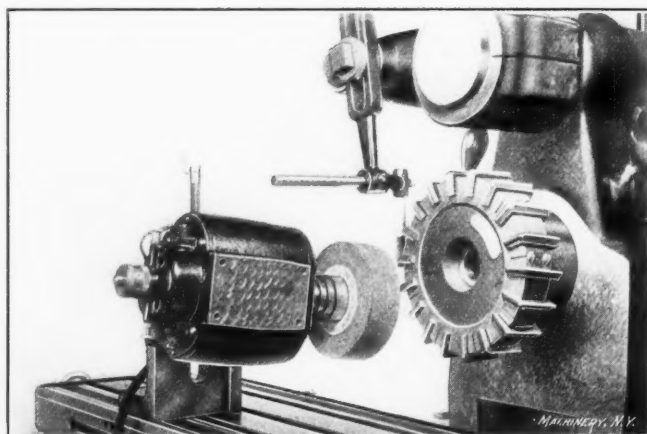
Sharpening the Face of a Heavy Face Mill in place on the Milling Machine.
